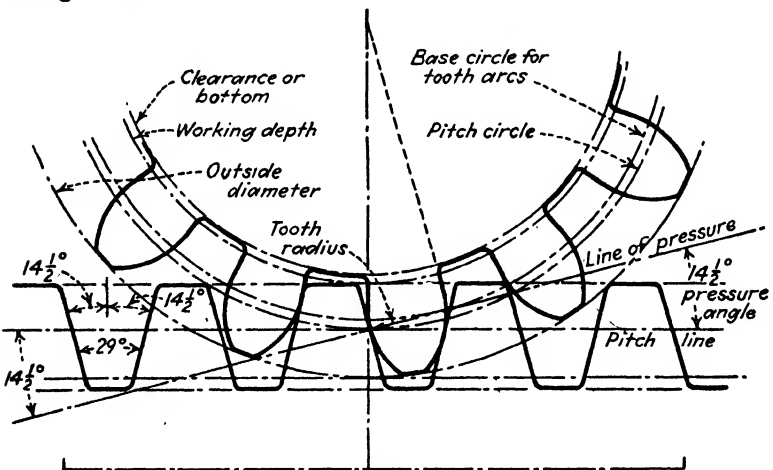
Action of standard $14\frac{1}{2}$ -deg. tooth gear and rack.
